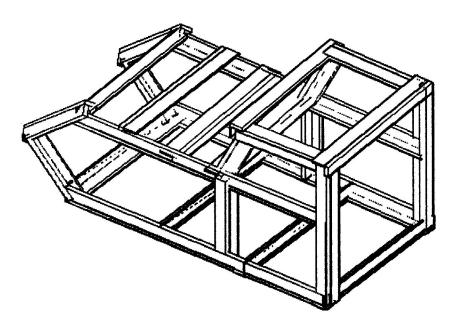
3D Design of the frame of the Laboratory Polishing Machine
